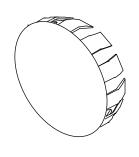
BOTTOM RACEWAY SHIPPING SPLIT FASTENER PACK P/N 386-03418-000 (4 each per pack)
